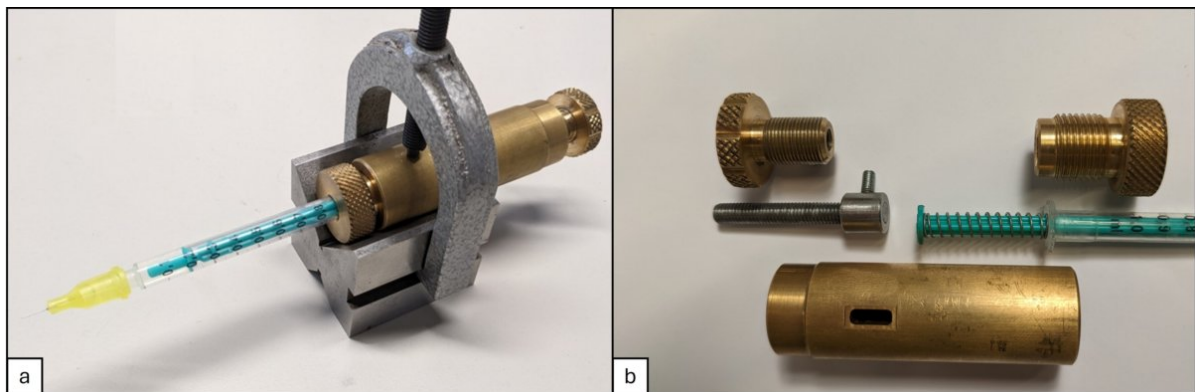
a. Assembled mechanism mounted in a toolmaker's V-block. b. All parts before assembly. Note that the syringe handles are clipped off to fit in the mechanism. There is also a spring installed around the syringe plunger to add a small preload in one direction to eliminate any play in the differential screw arrangement.
